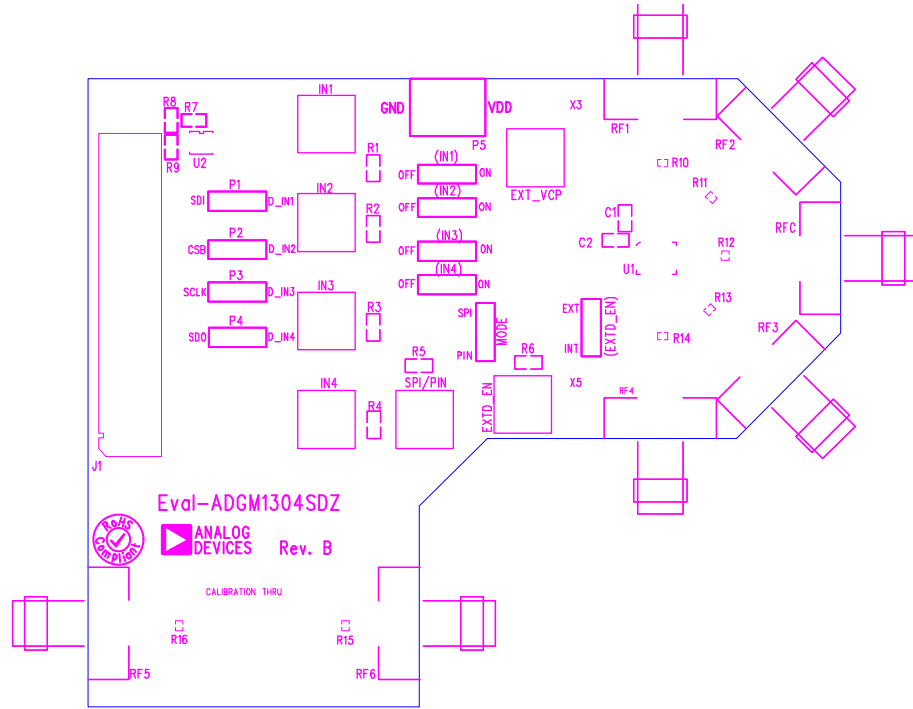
EVAL-ADGM1304SDZ Component Side Silkscreen PCB Drawing (Top)
